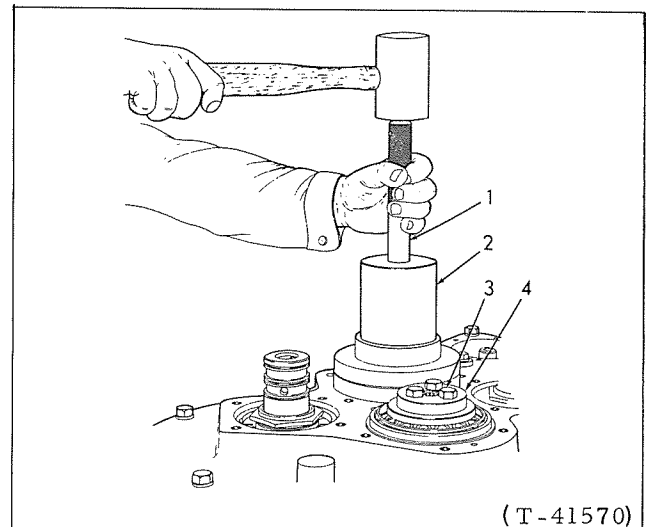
INSTALLING INPUT SHAFT FRONT BEARING
